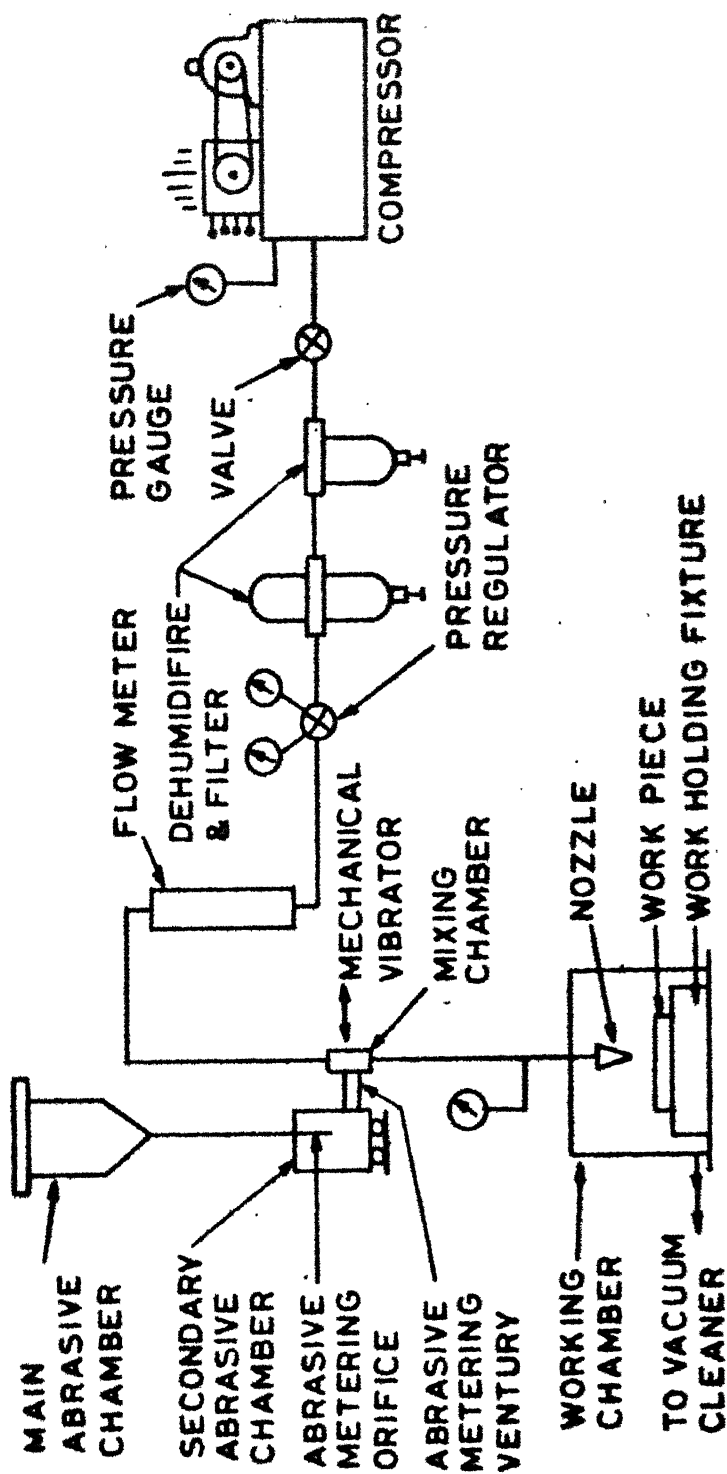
SCHEMATIC LAYOUT OF ABRASIVE JET MACHINE
